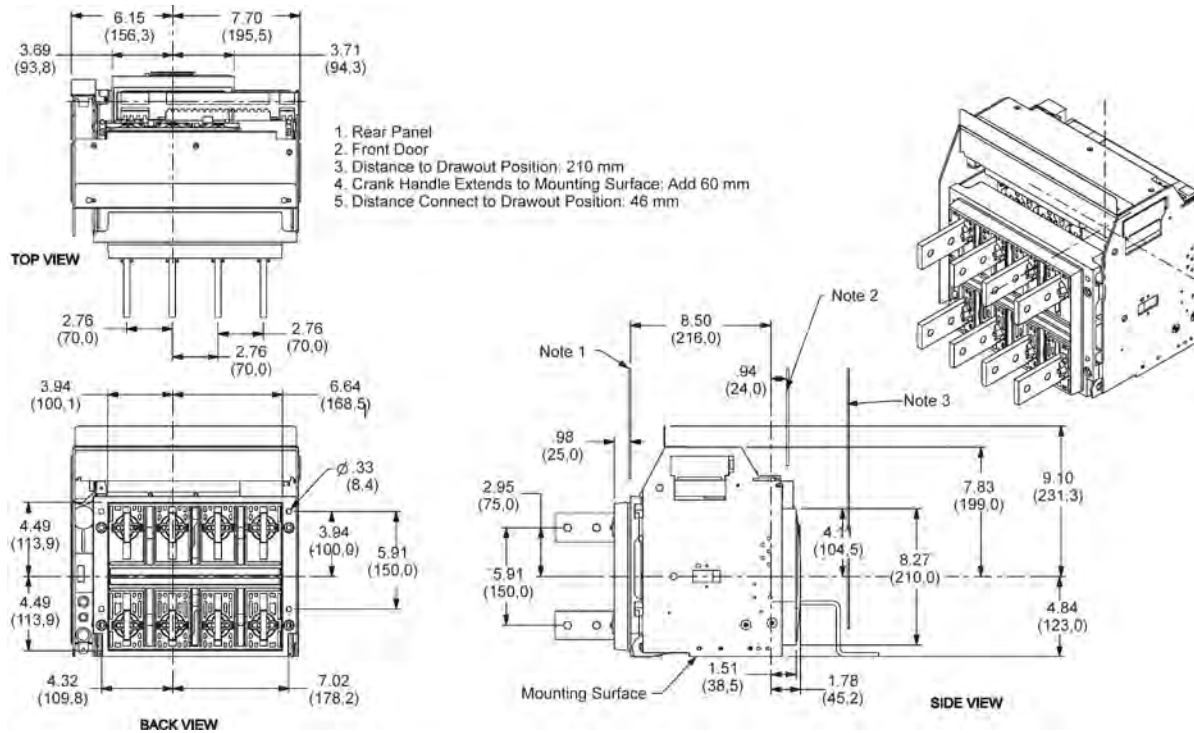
800–1200 A MasterPact NT Drawout and Fixed—Pan Dimensions
